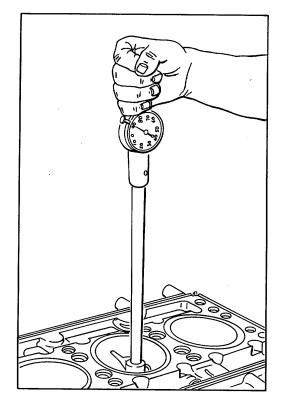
Checking Bore of Cylinder Liner using Tool J 5347-01
